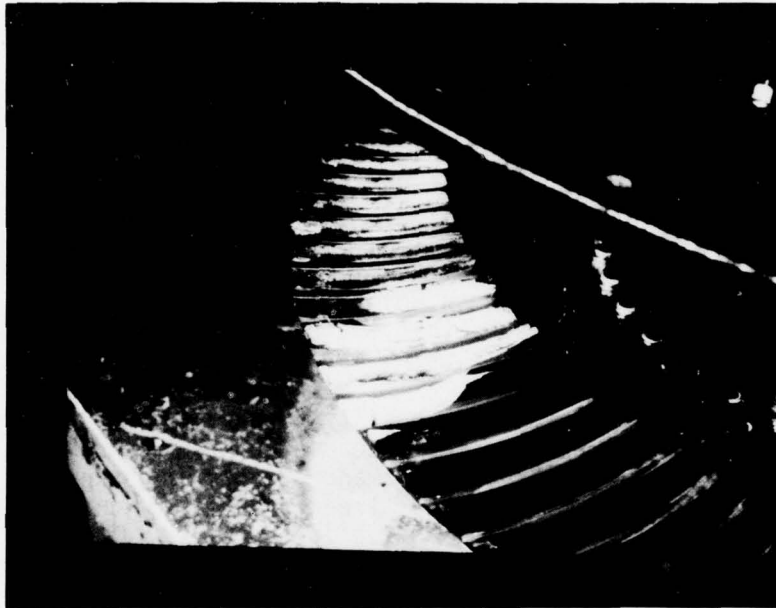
Gear Tooth Failure Caused by Fillet Radius Control Problem.
